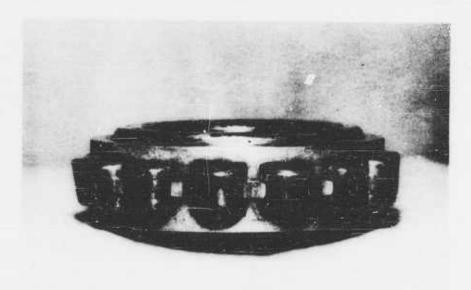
MRC 205-C Roller Bearing - Inner Race and Rollers SAE 52100 Steel and Cage - Bronze
